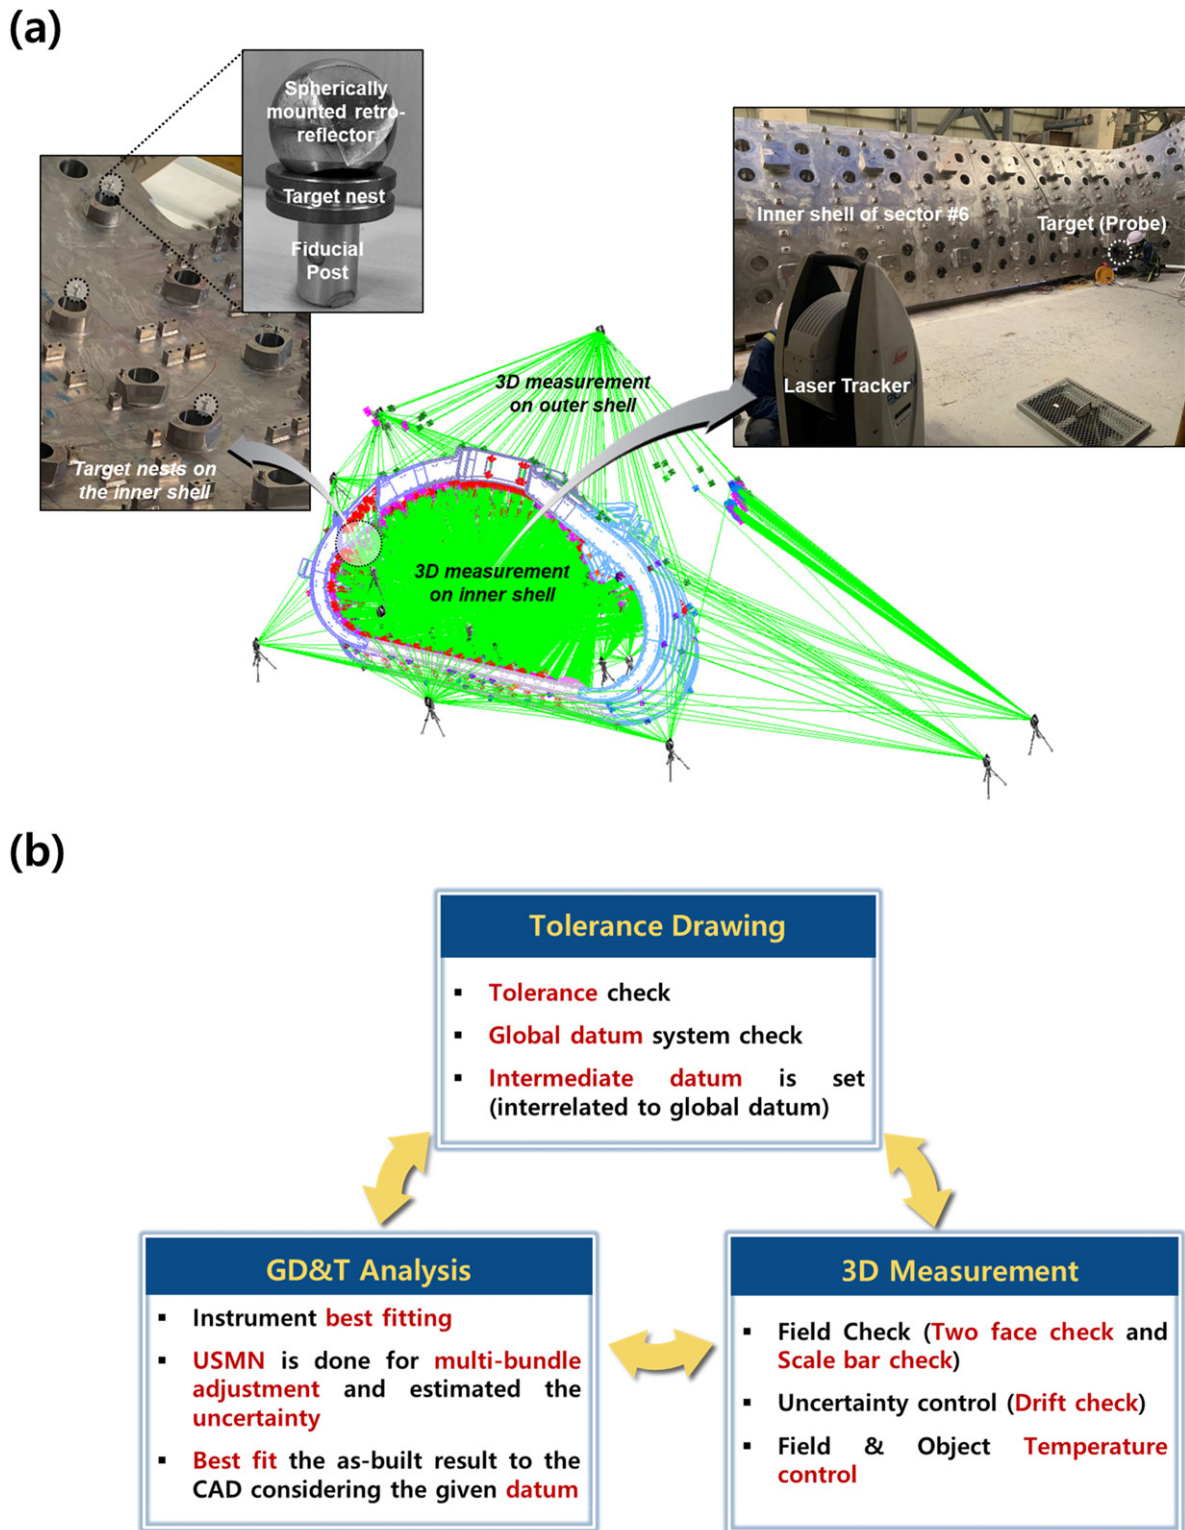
Three-dimensional measurement scheme and final dimensional inspection strategy: (a) actual 3D measurements using a laser tracker and fiducial posts as the final dimensional inspection of sector #6. (b) Three-dimensional measurement strategy for the final dimensional inspection.
